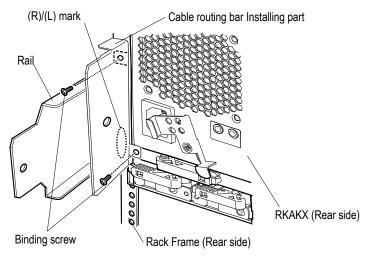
Installing the Cable Routing Bar Installing Part (Rev.A/Rev.B)
